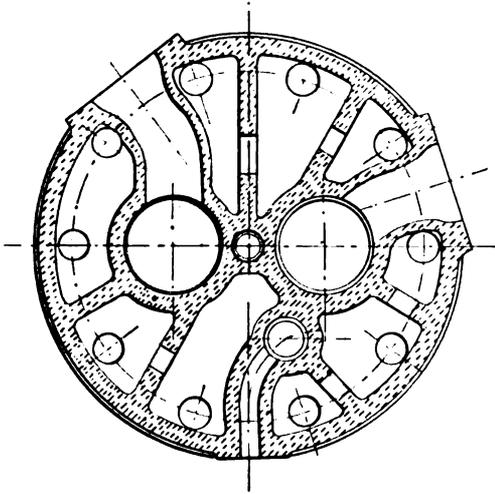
Section of Cylinder Cover (Diesel Engine).
